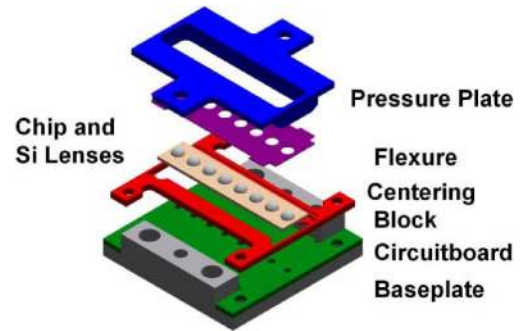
(Color online) Exploded view of  $1 \times 8$  detector module.
